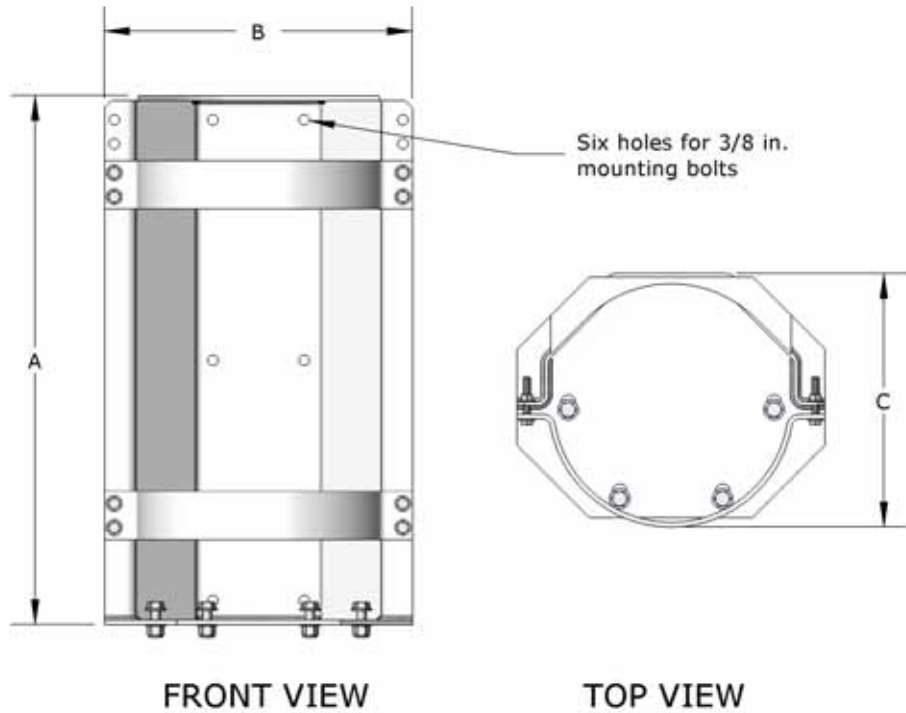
Sentinel DCS-68 Cylinder Mounting Bracket Dimensions
